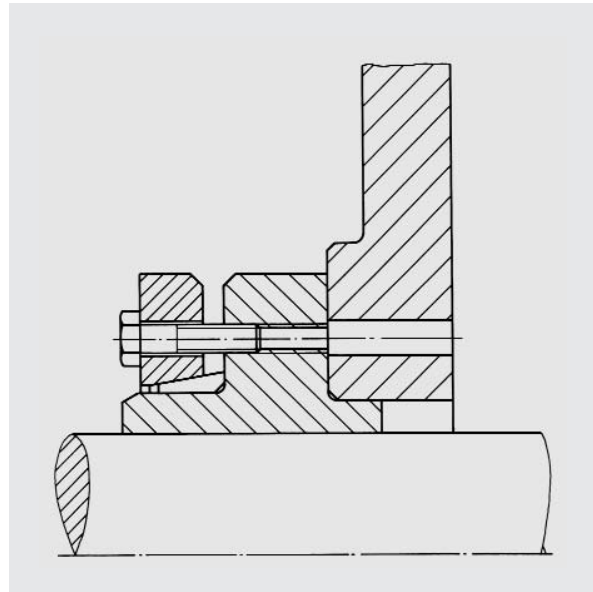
· Brake disc mounted with a Shrink Disc RfN 4091
